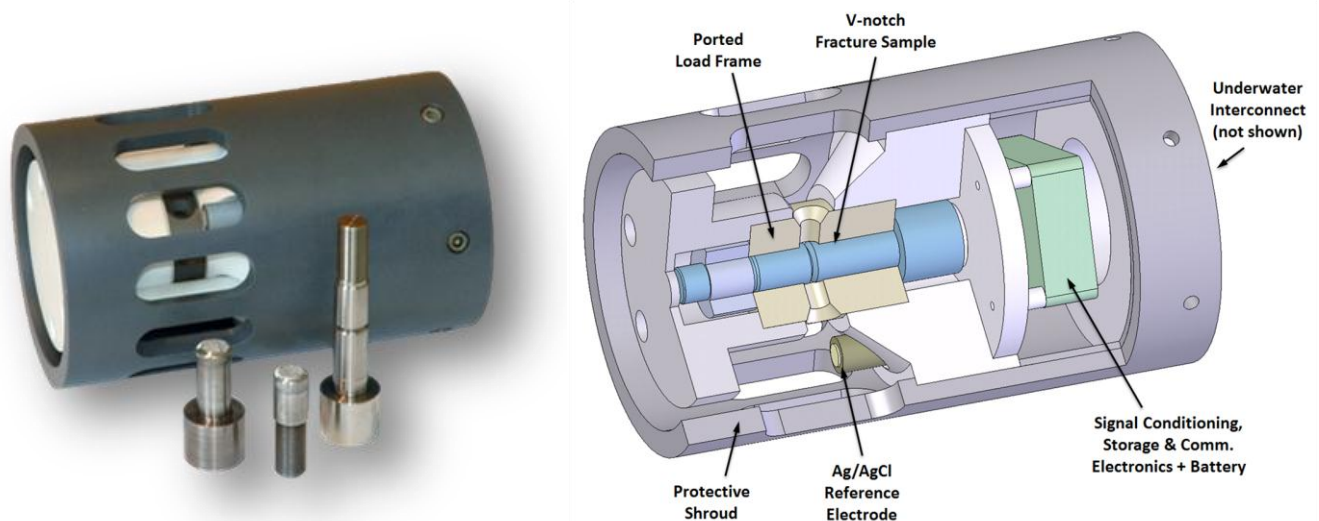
EAC sensor node assembly (left), and cutaway view (right). Sensor diameter is 114 mm [4.5 in].
